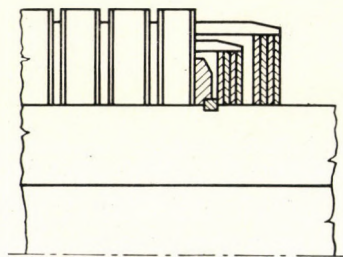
Double-cage rotor with a ring located on the shaft-ribs
